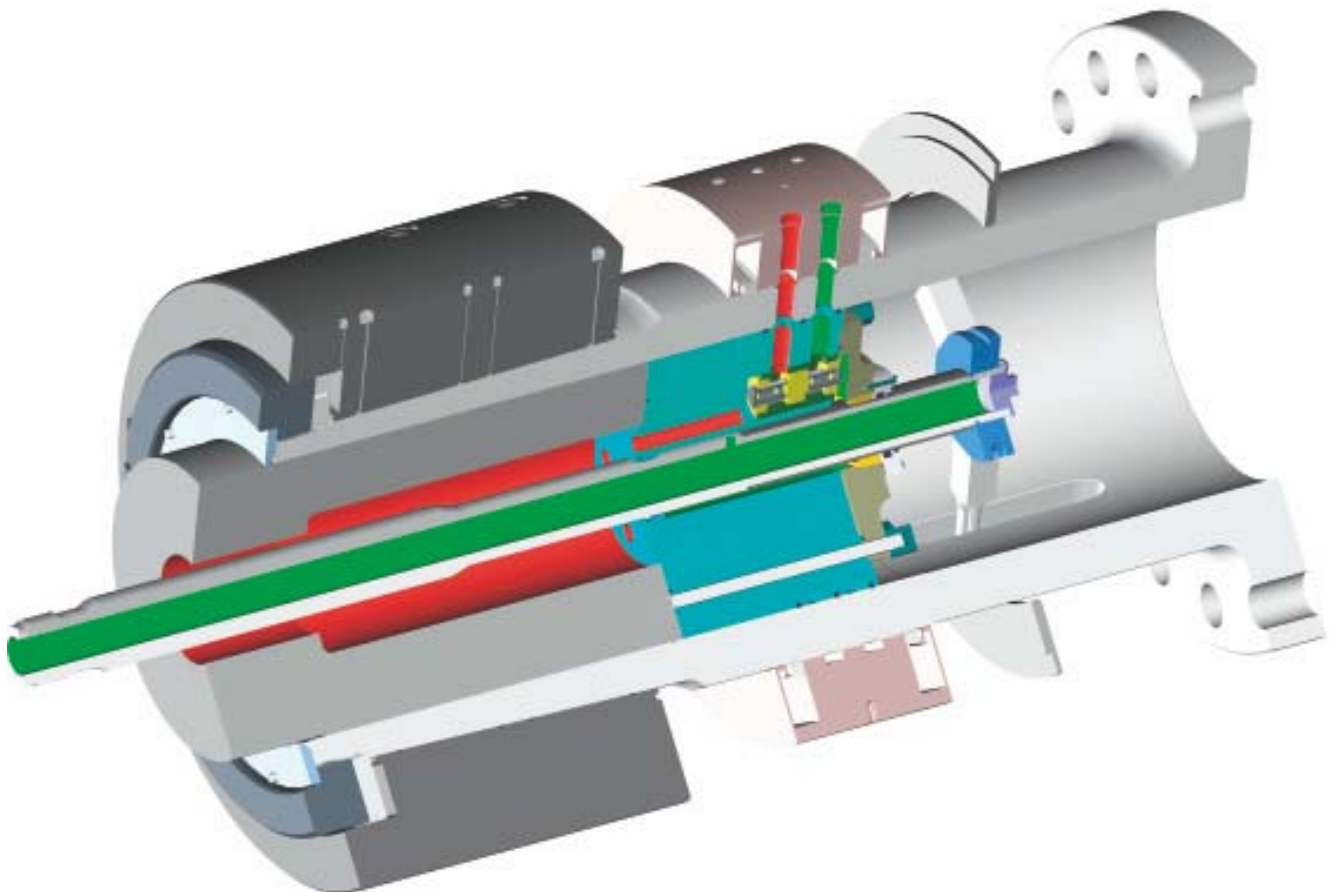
ODS type - OD box with coupling flange and pitch feed-back ring
